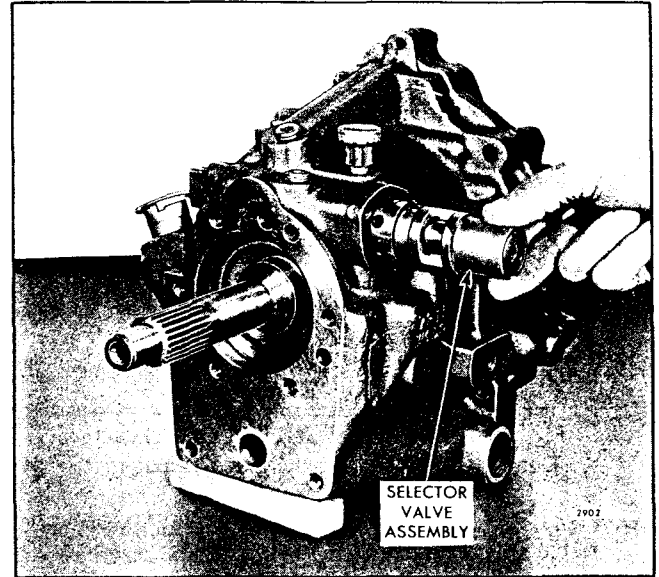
Installing Selector Valve Assembly in Gear Housing
